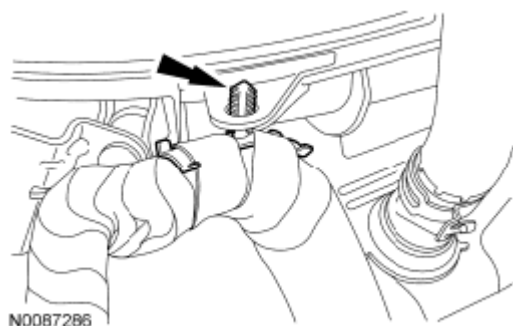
Locating Wiring Harness Retainer To Upper Intake Manifold
